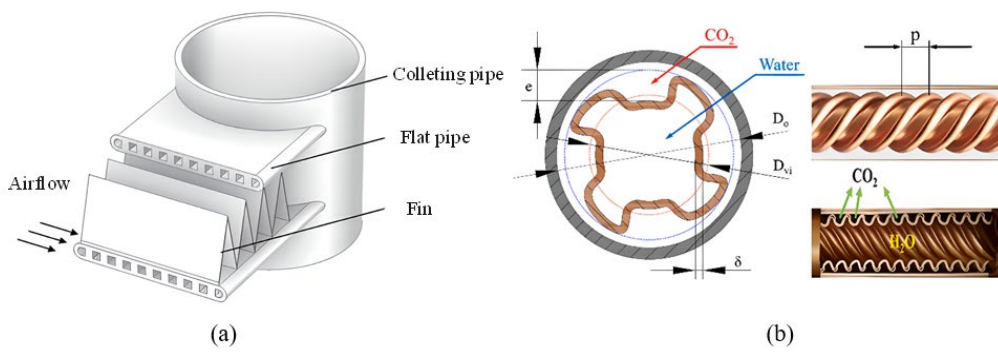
Different heat exchanger geometries: (a) microchannel heat exchanger geometry and (b) spiral groove tube geometry.
